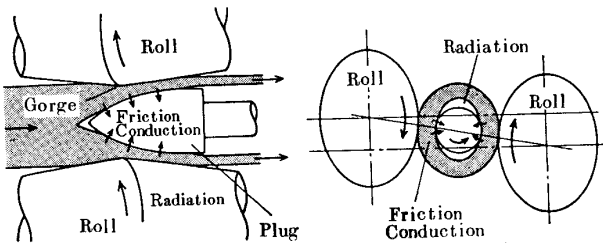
Schematic view of steel piercing by cross roll piercer.
